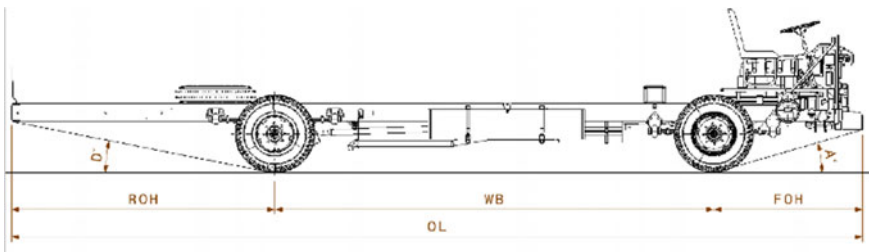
Dimensions of Ashok Leyland 222" vehicle
